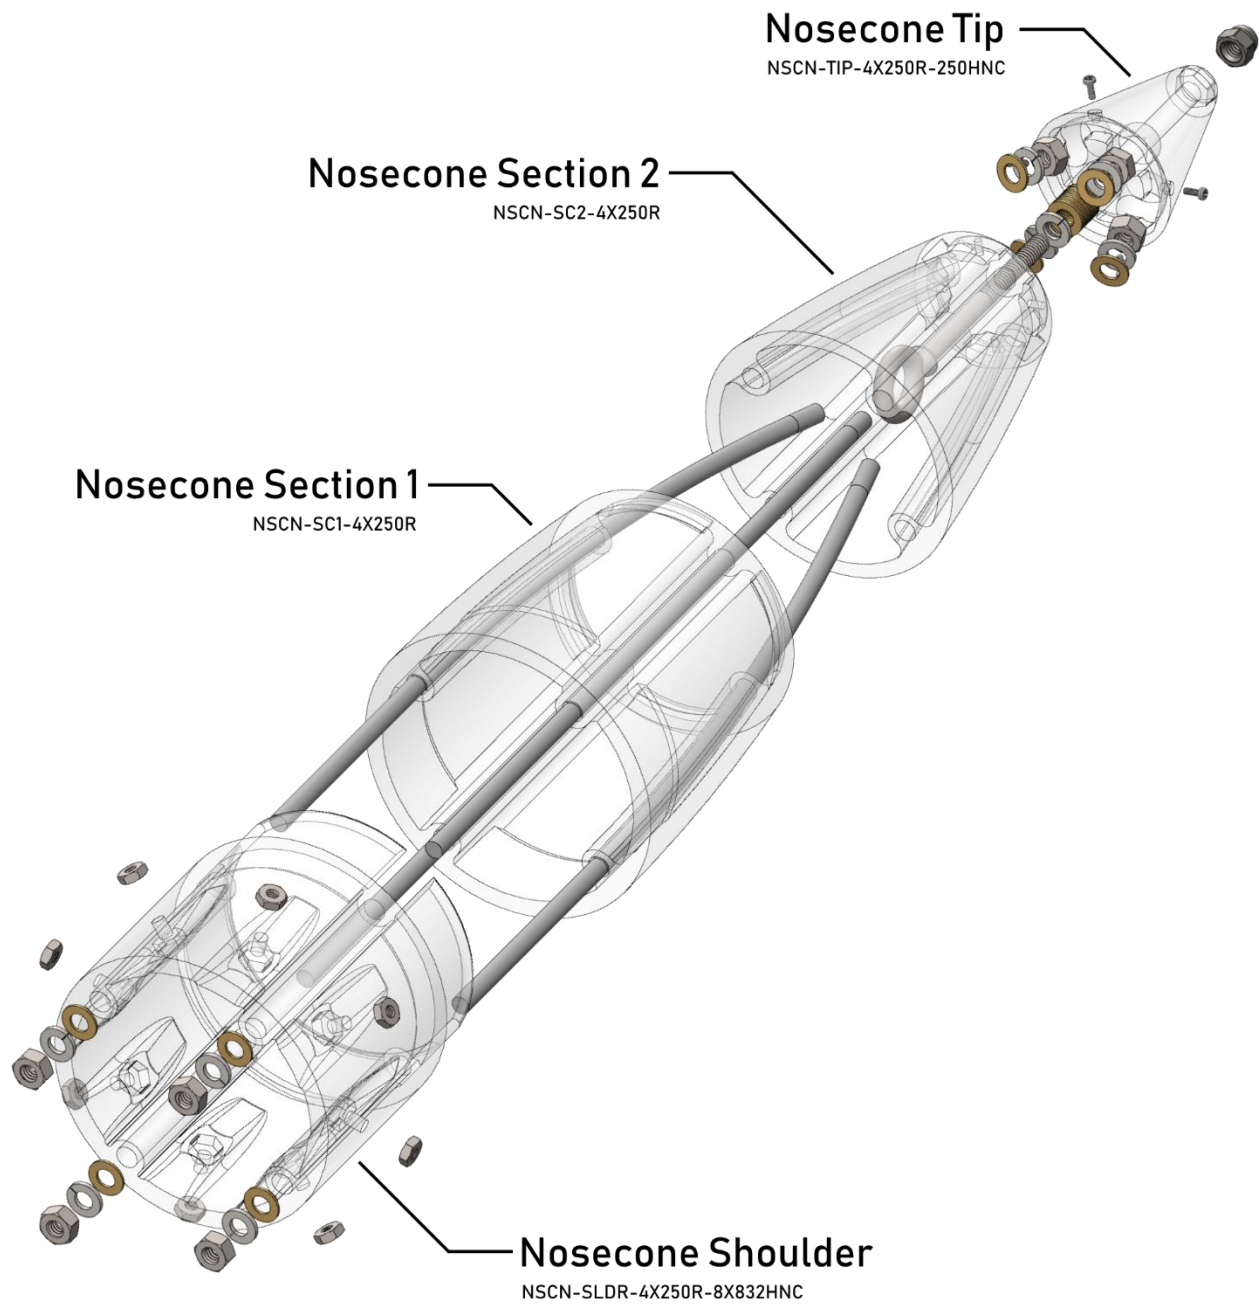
Exploded-view diagram of Mojave Sphinx nosecone assembly
